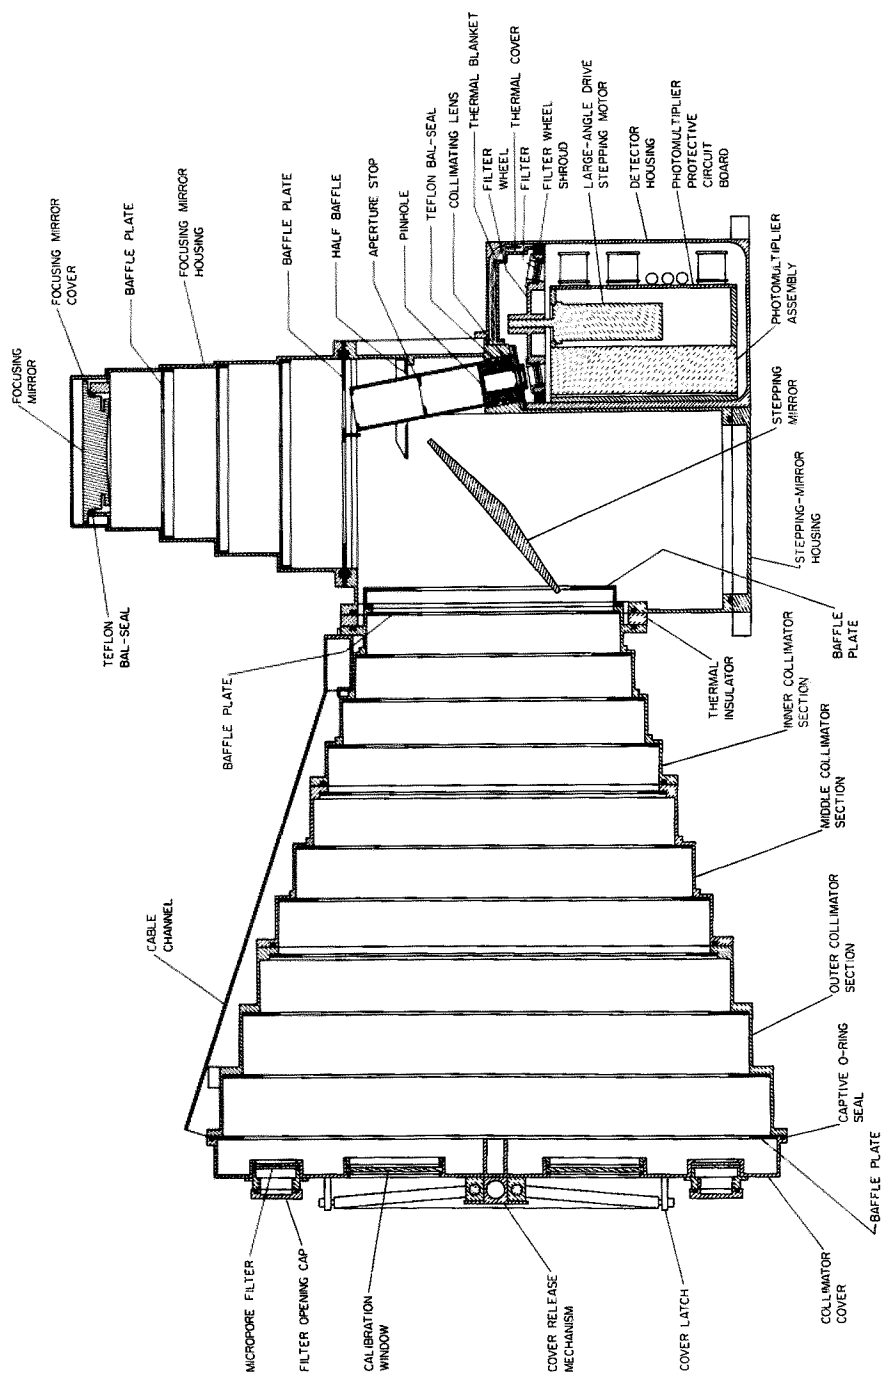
Detailed mechanical drawing of the cross-section of an imaging photometer in the plane containing the optical chief ray.
